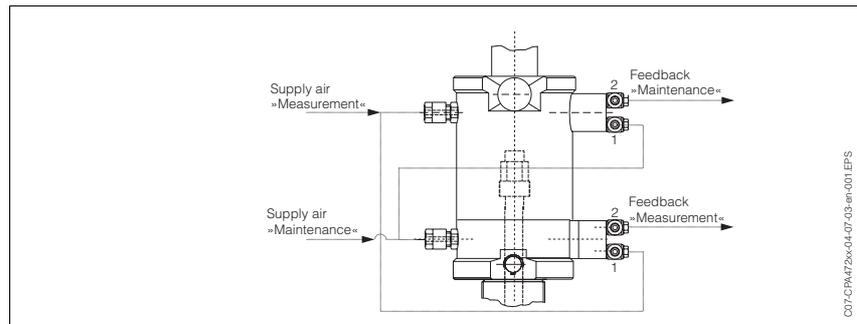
Connection of the pneumatic lines to the CleanFit CPA 47x assembly.
